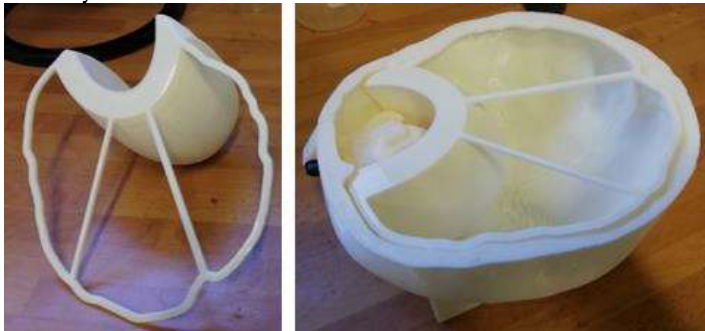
Final 3D printed mold of the working area (left) and assembly with the brain mold (right).
